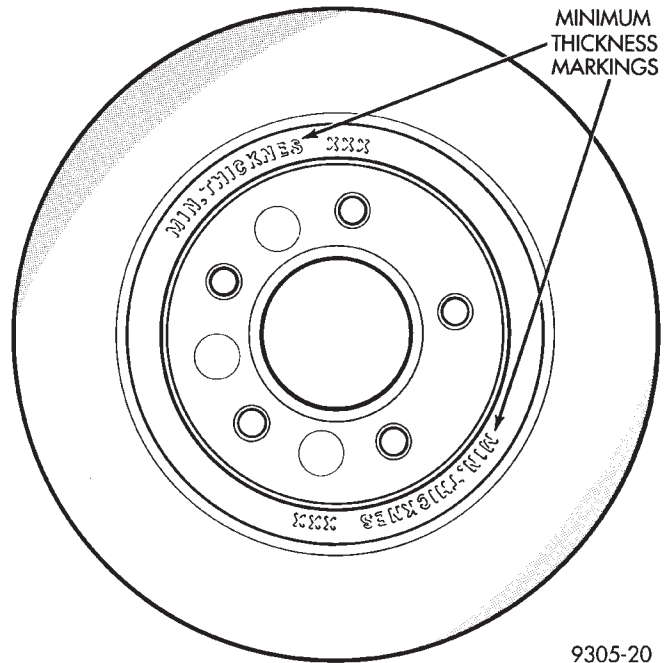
Minimum Brake Rotor Thickness Markings (Example)
